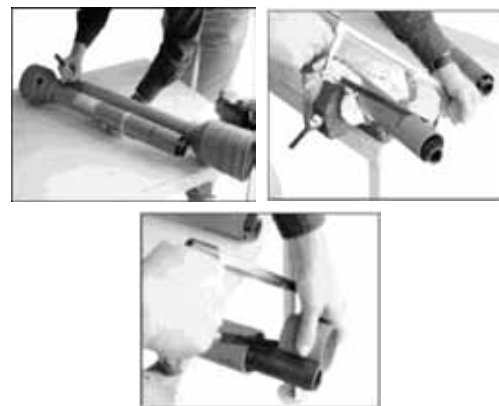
Cutting the shaft spindle for a suitable length for the tractor
